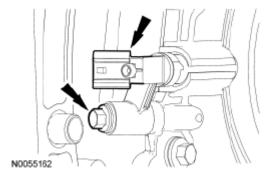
Locating LH CMP Sensor Courtesy of FORD MOTOR CO.
